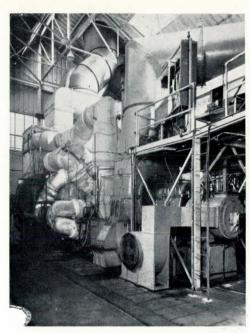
E.L.60A gas turbine in test house view from starter motor end
